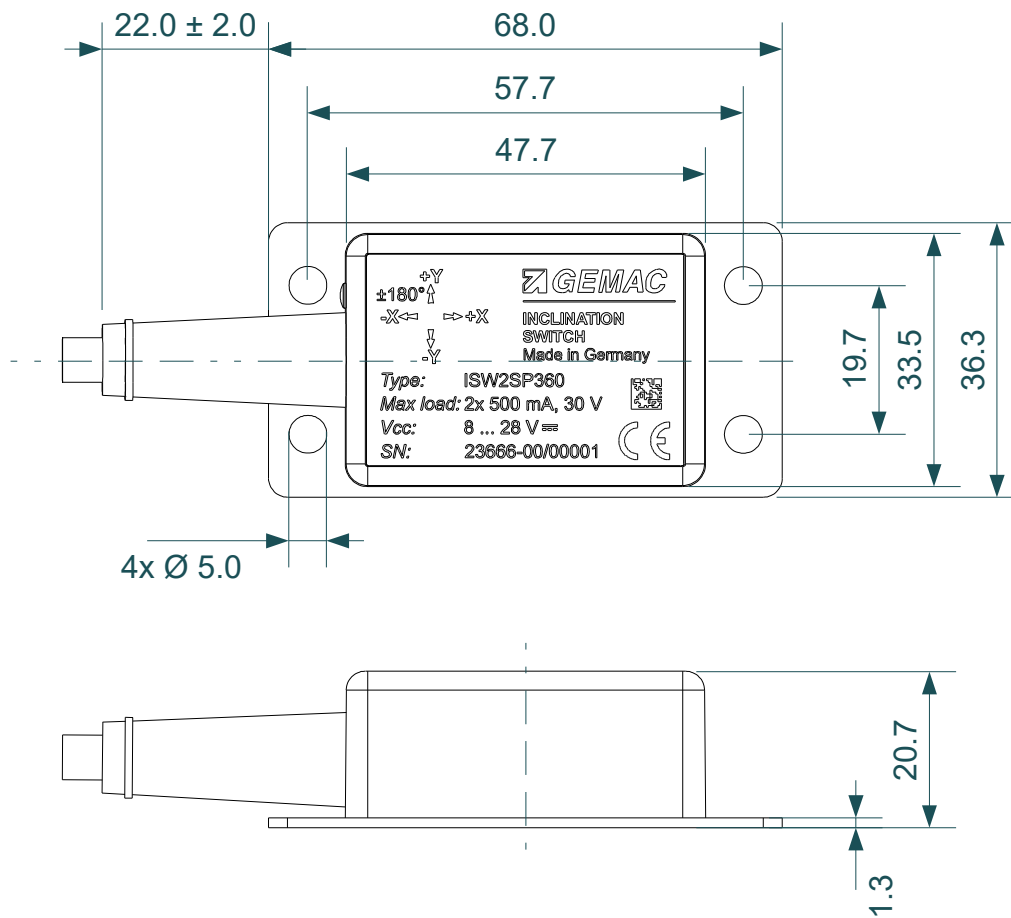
Dimensioned drawing ISW2SP360 (dimensions in mm)
